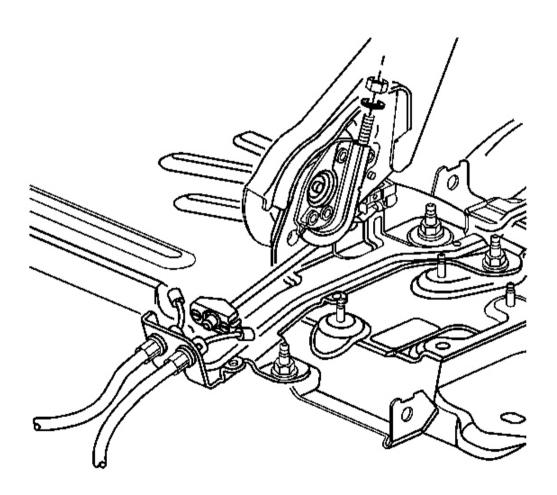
View Of Front Park Brake Cable Courtesy of GENERAL MOTORS CORP.
